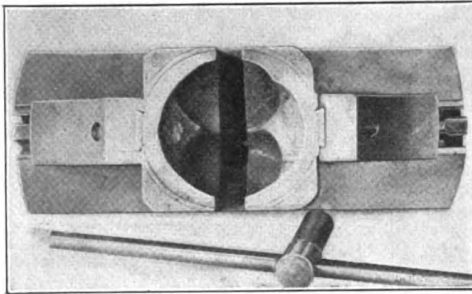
CHECKING FIXTURE FOR HOLDING MIXING CHAMBERS IN TURRET LATHE
